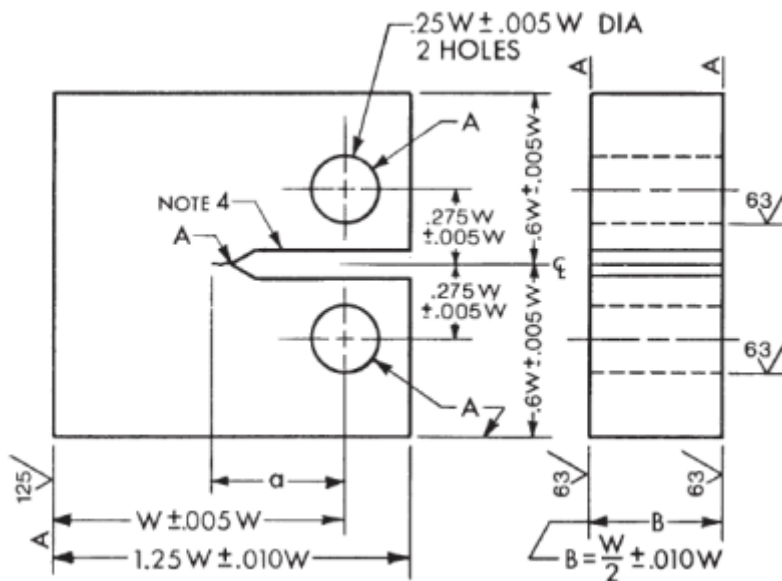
Specimen dimension requirement in ASTM E399 [46]
